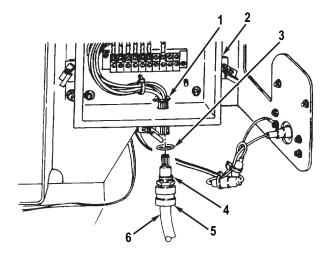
Signal Conditioning Box Cable Assembly Wiring Harness Installation.
